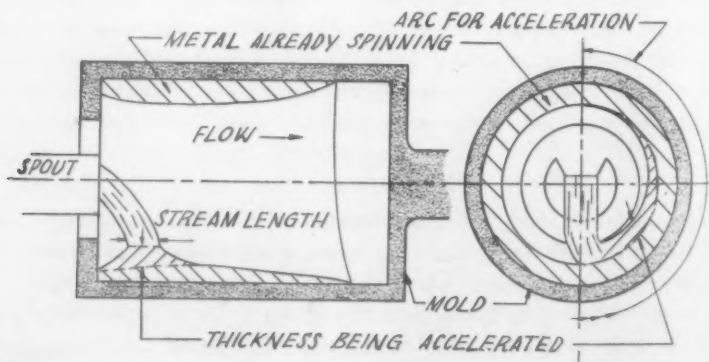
DESIGN OF SPOUT POURED HORIZONTAL MOLD.
